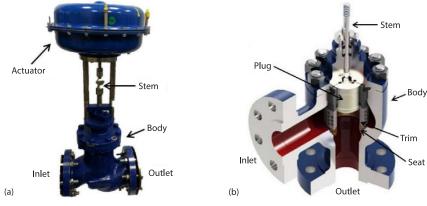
Components of the control valve; (a) valve with the actuator and (b) valve body with the trim [1]
